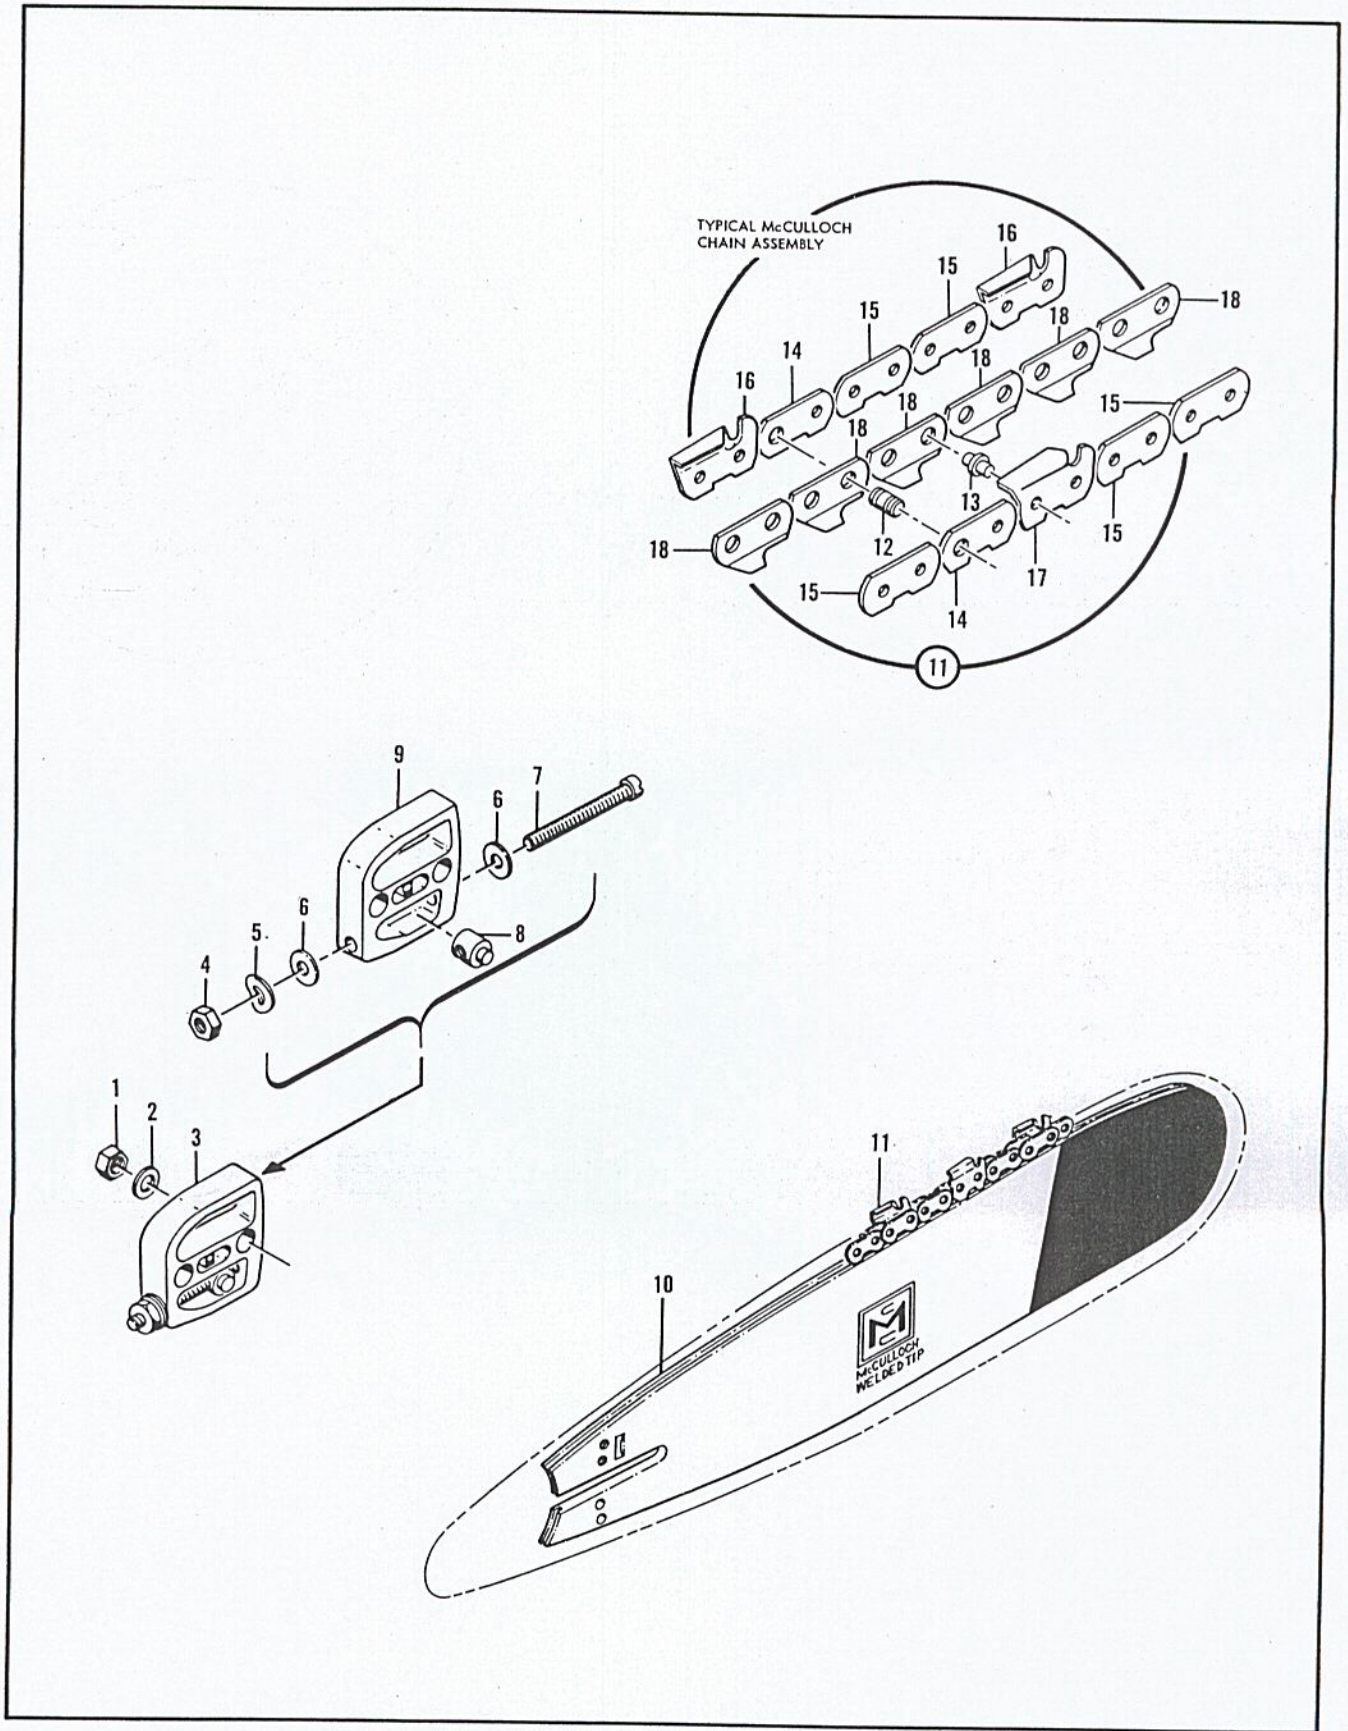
Lockplate Adjusting Assembly, Bar and Chain
